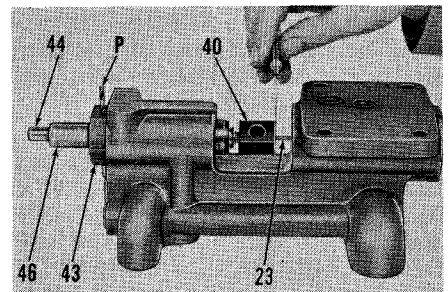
Checking adjustment of valve keeper (40). Position control valve spool (44) so that a 1/8-inch diameter pin or drill bit (P) can be inserted through spool and bushing (43), then measure gap between keeper and actuator rod (23) for drop poppet. Control valve spring seat is (46).
